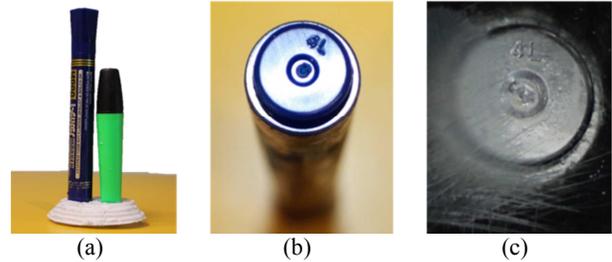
(a) printed pen holder (b) the bottom of a marker pen (c) the texture imprinted on the substrate
